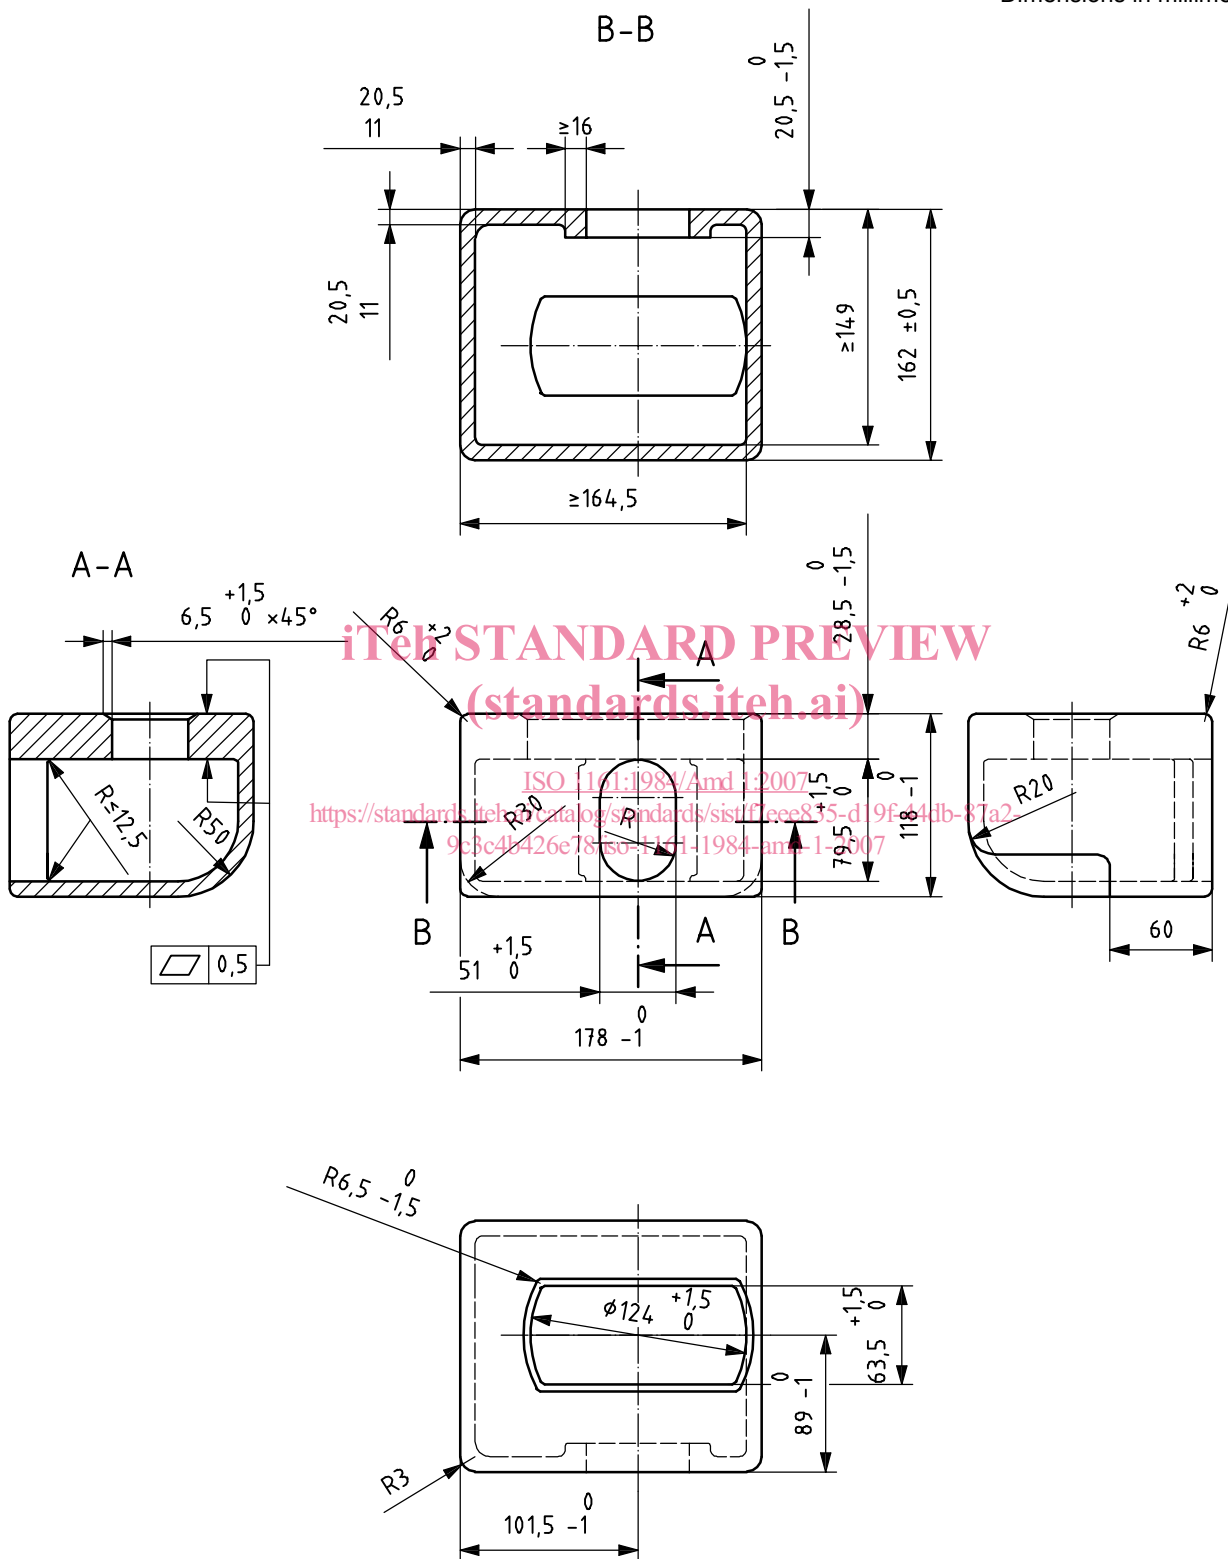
Top intermediate fitting — Dimensions in millimetres
